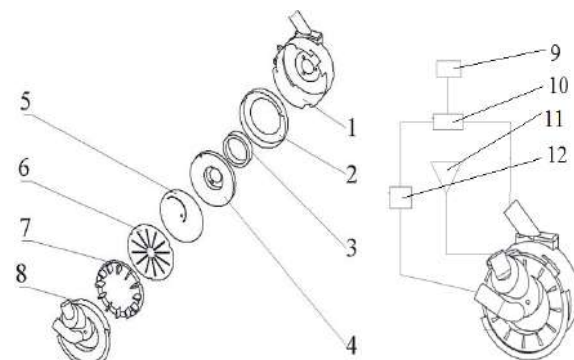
Structure of the combined pneumatic SMD (a) Exploded-view drawing (b) Assembly drawing
